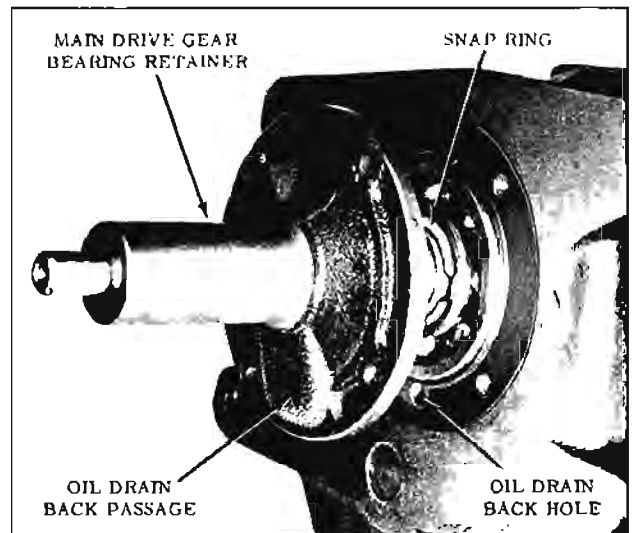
Main Drive Gear Bearing Retainer Removal
